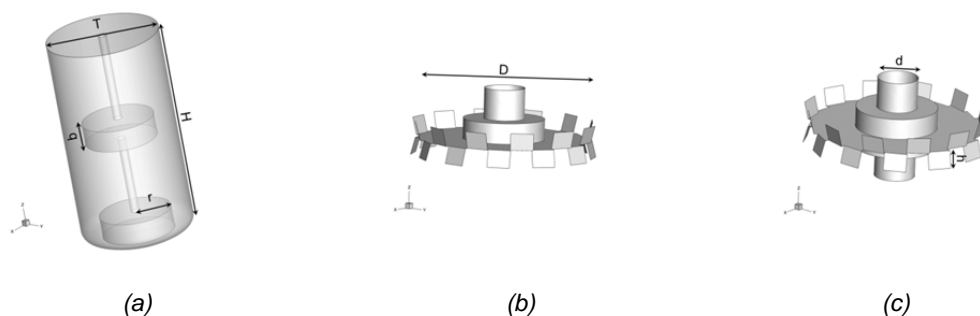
(a) 3D representation of the tank and Cowles impellers: (b) lower and (c) upper.
